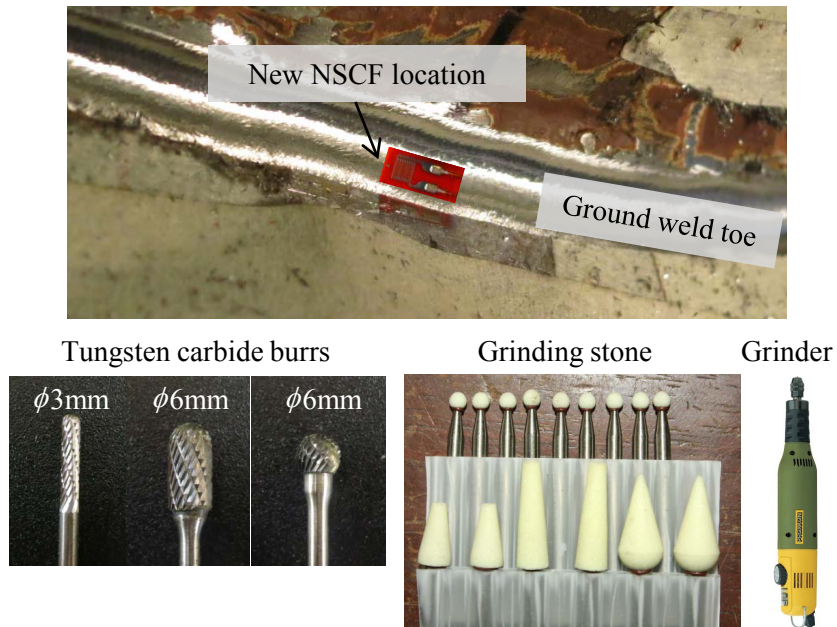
Example of ground weld toe with new strain measuring location and grinding instruments
